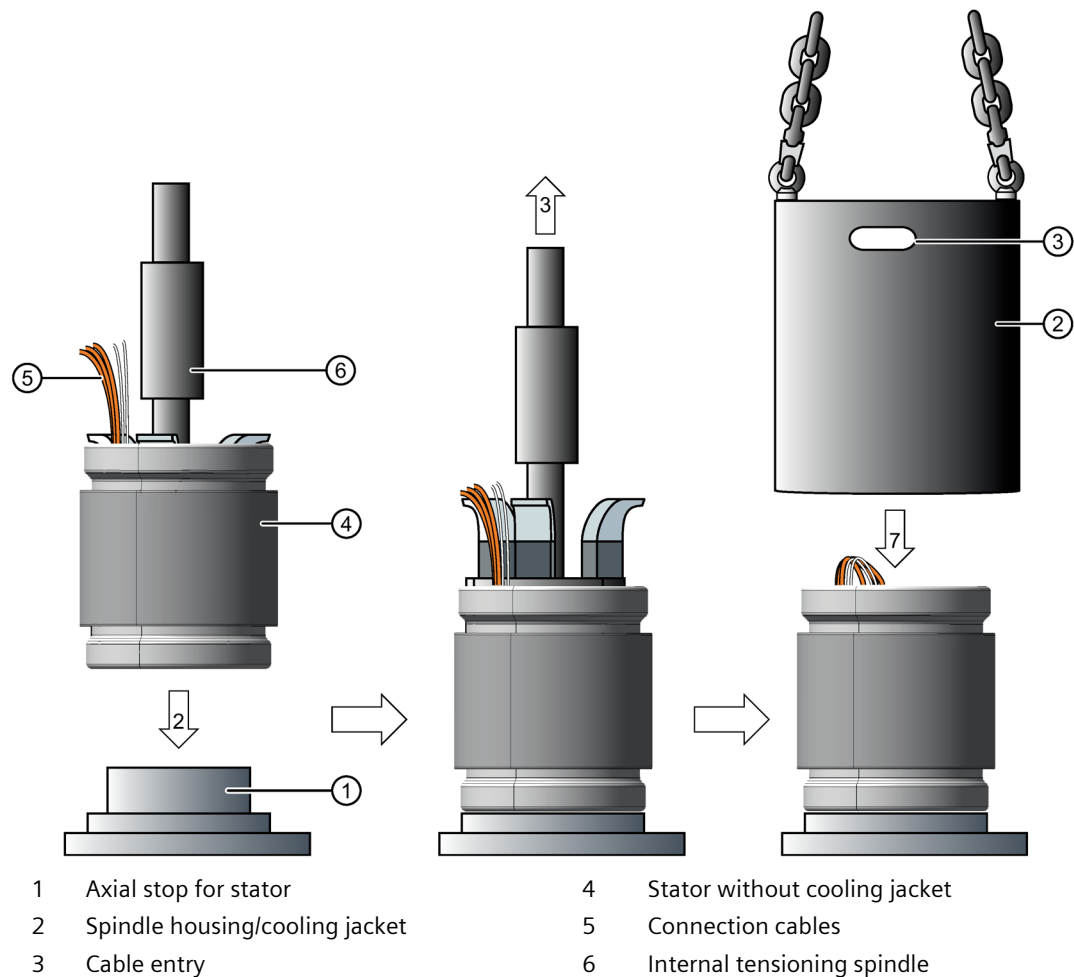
Mounting the spindle housing over the stator without cooling jacket, steps 2, 3 and 7
